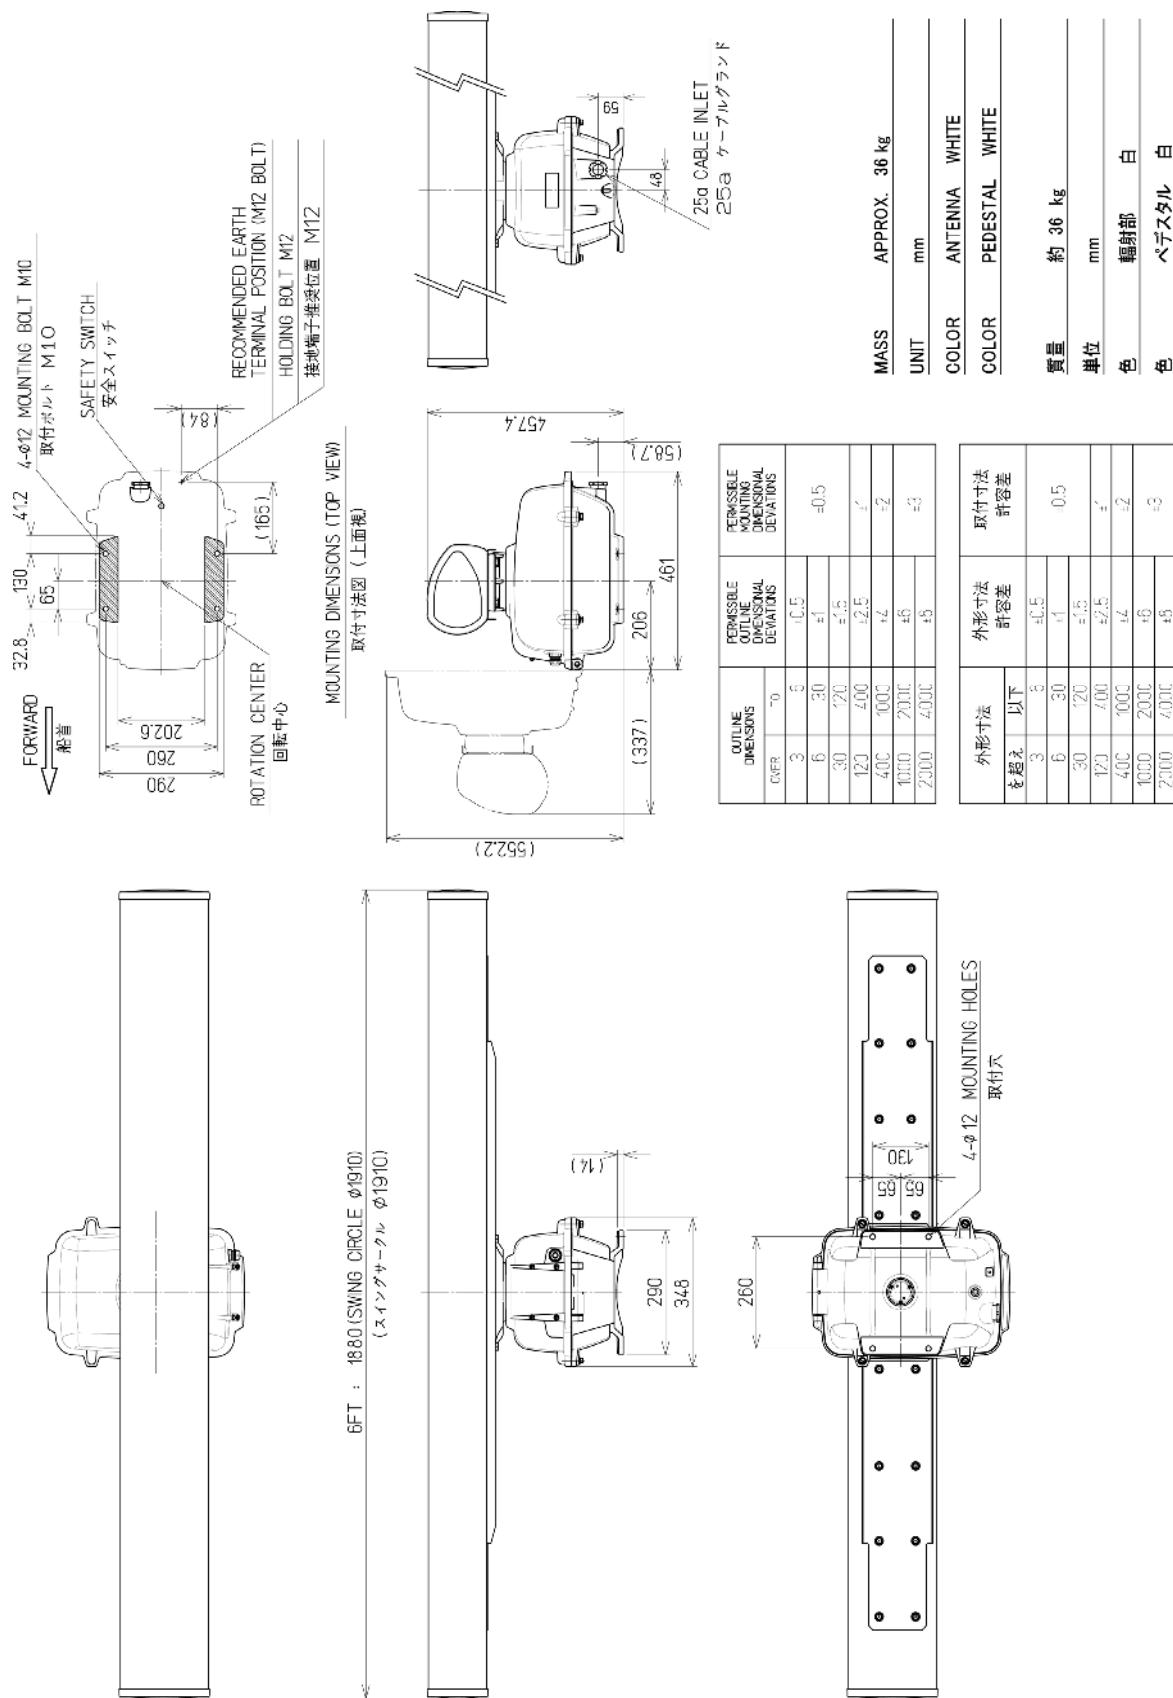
Exterior Drawing of Scanner Unit, Type NKE-2103-6/6HS
